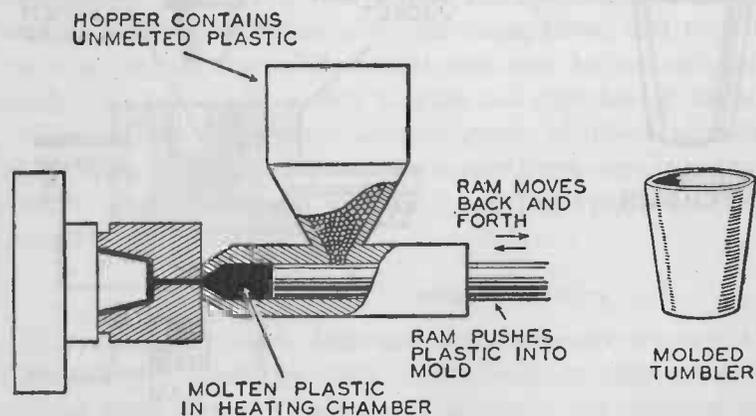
C. — Molding a Thermoplastic Plastic. This is a more rapid process than molding a thermosetting plastic. The mold shown is also for making a molded tumbler. The portion of the mold called the cavity is shown in section.
